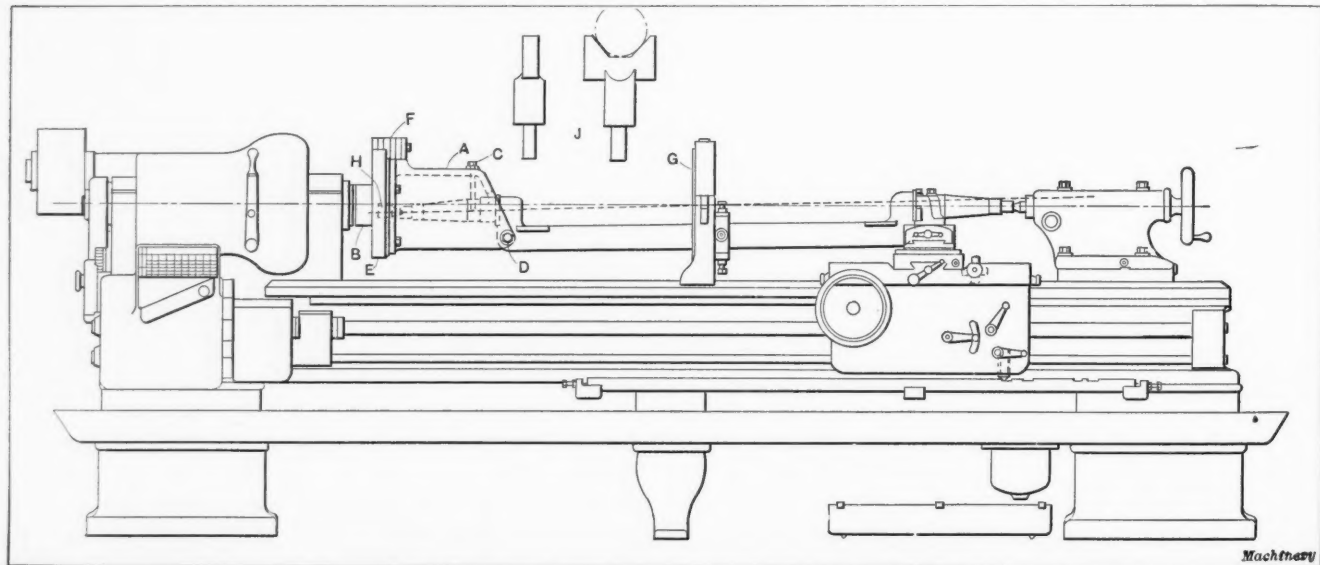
Axle Turning Lathe, showing Fixture for Axle Turning and Detail of V-block J
